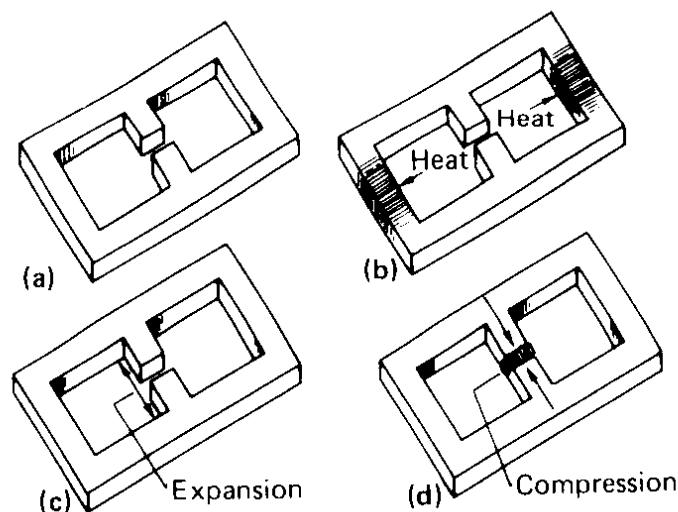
Proper method of preheating cast iron castings to prepare samples for welding. (a) Casting at room temperature. (b) Heat applied to perimeter of casting. (c) Vertical members of casting in tension. (d) Vertical members in compression ready to be welded
